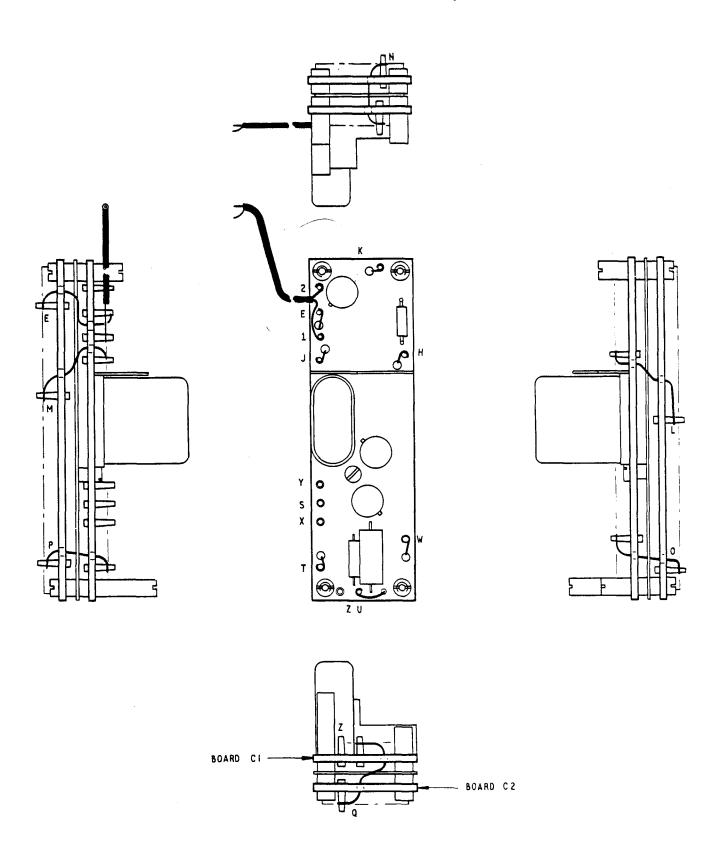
Unit C, i.f. assembly, interboard wiring
